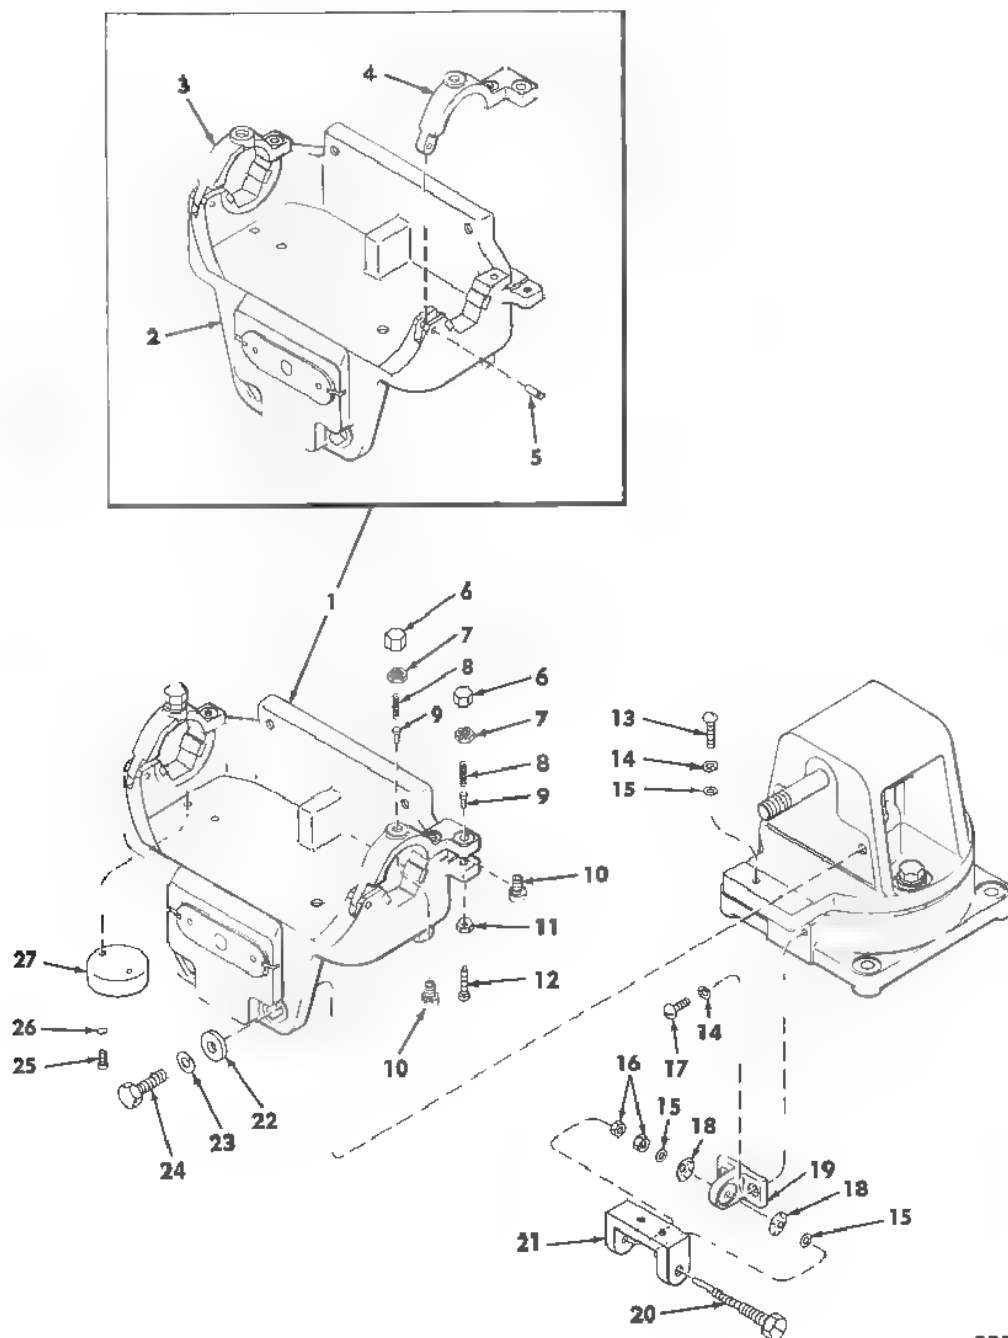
BASE, ANTENNA /9136028/-EXPLODED VIEW
